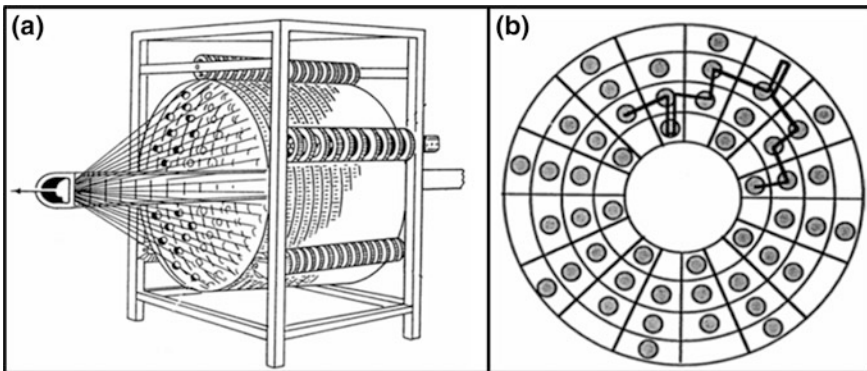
Schematic view of a 3D circular braiding machine [51]. b Yarn carrier path [166]
